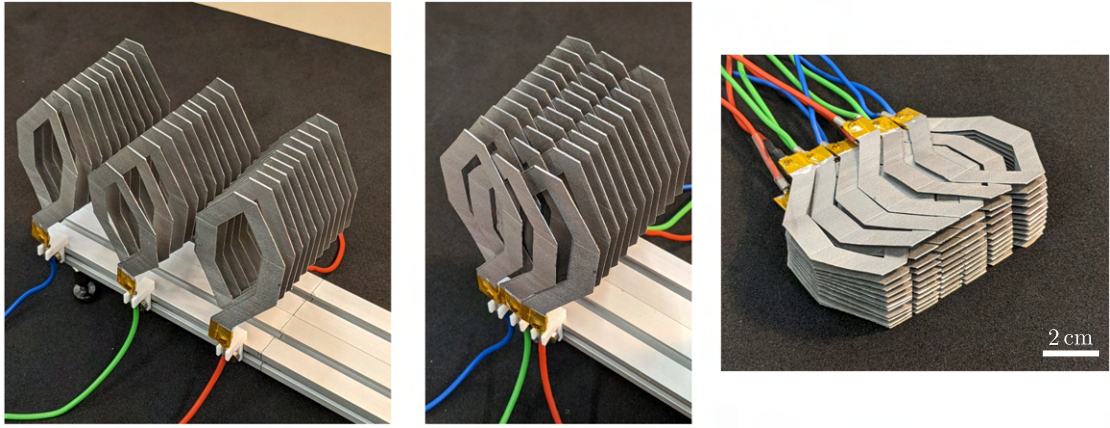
Rail for assembly of the *out-of-plane* coil type: (left) elongation of the coils; (center) slid coils for assembly; (right) assembled coils removed from rail.
